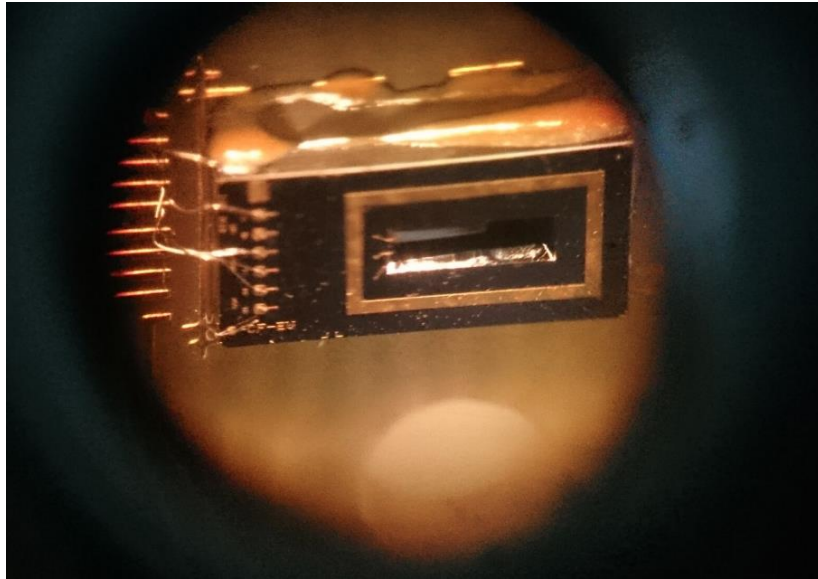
Zoomed image of damaged cantilever chip, with bent beam and connectors broken.
